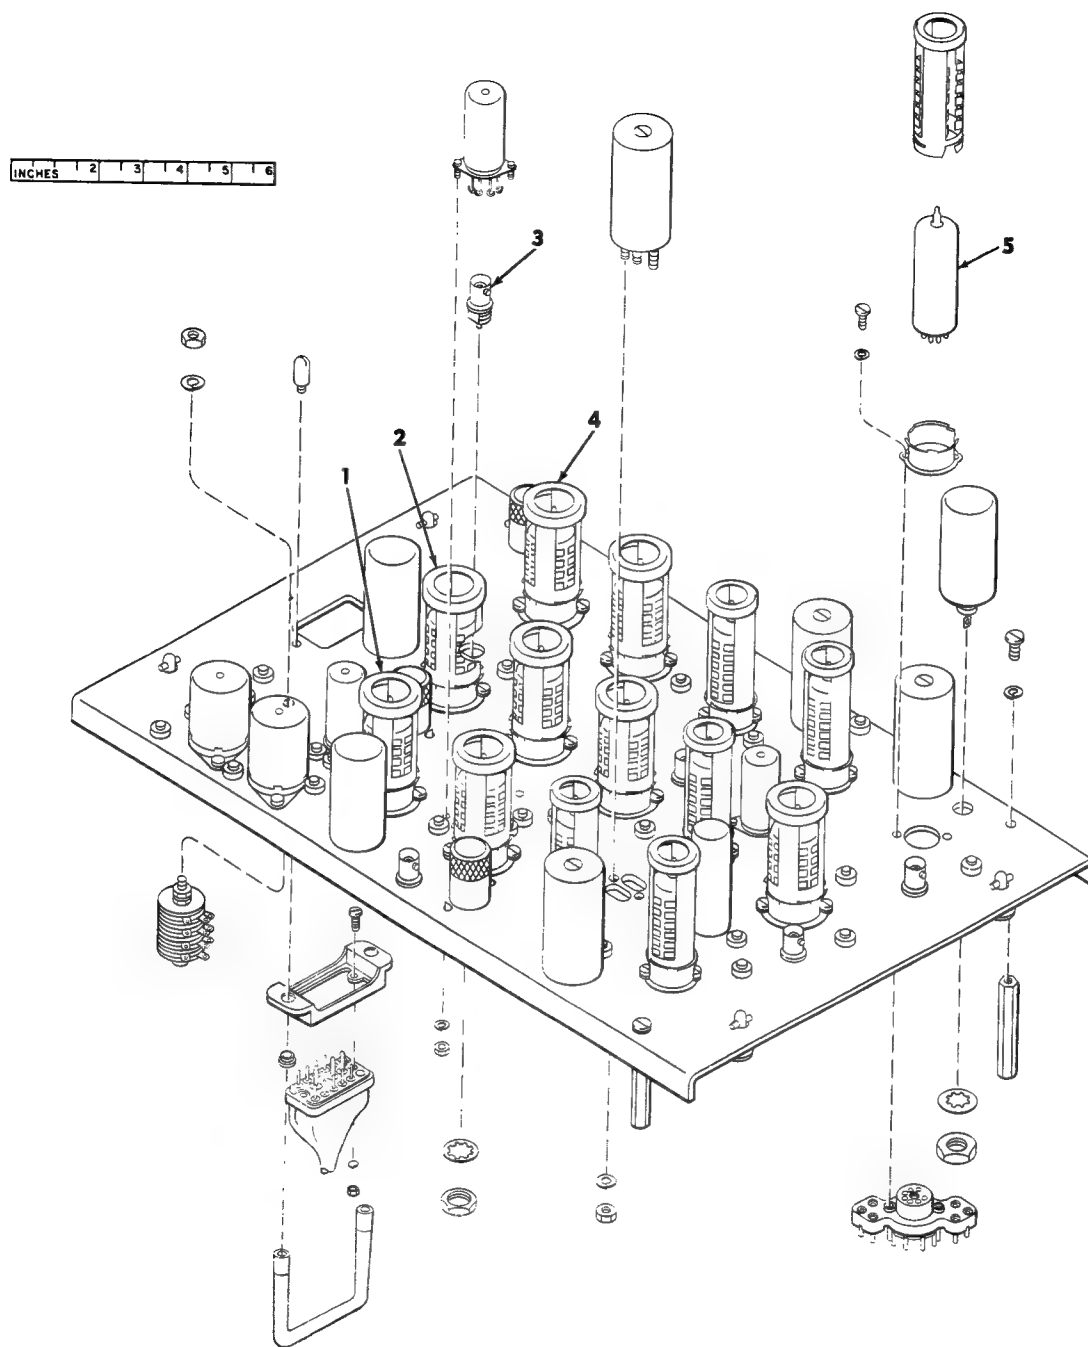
Synchronizer, electrical (9989392)—partial exploded view
